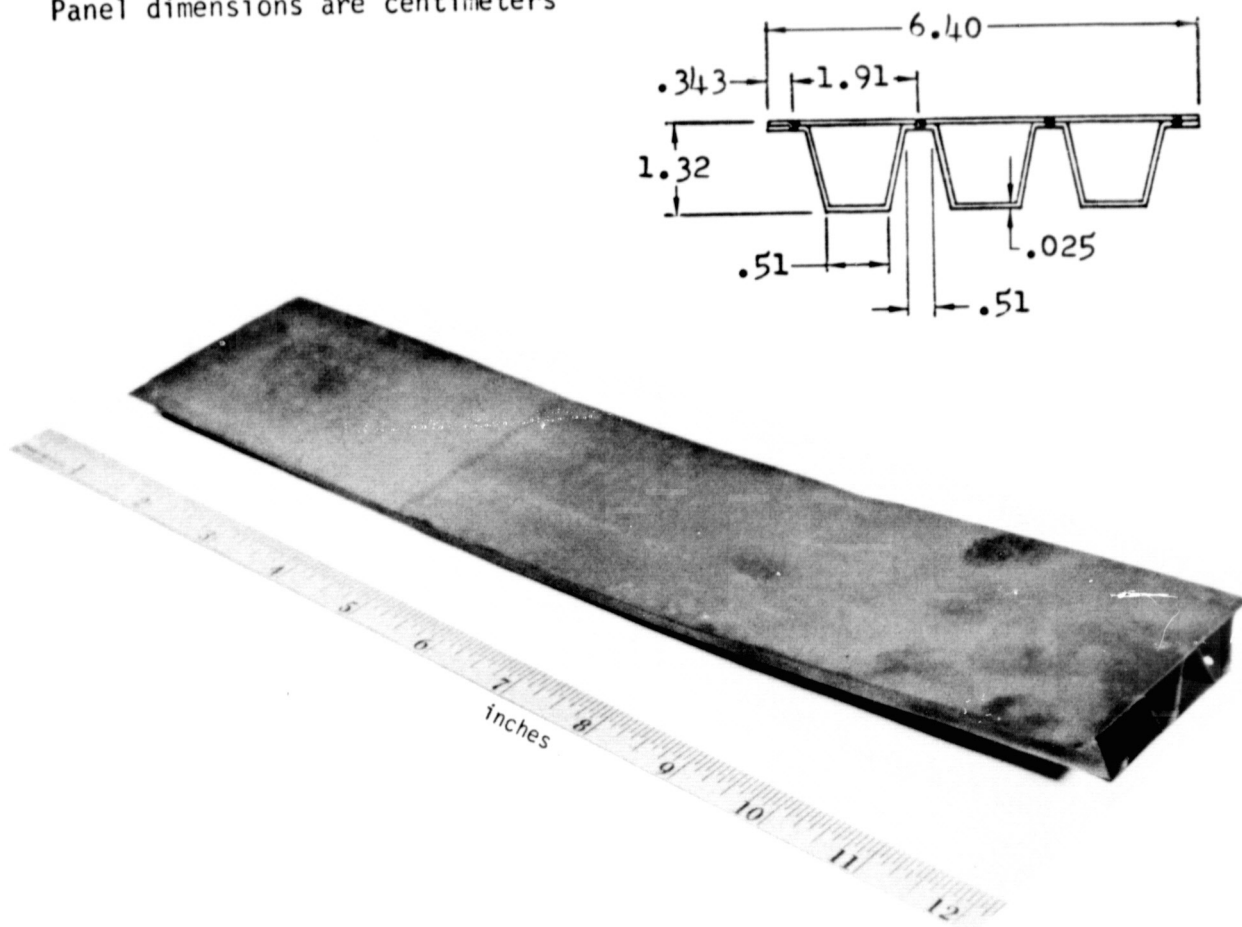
SUBSIZE PANEL L1 CROSS SECTION AND PHOTOGRAPH AFTER TEST
